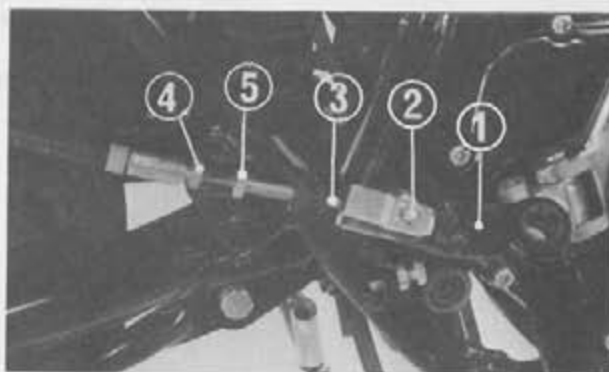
(1) Rear brake pedal (2) Cotter pin (3) Rear brake cable (4) Lock nut (5) Adjusting nut
